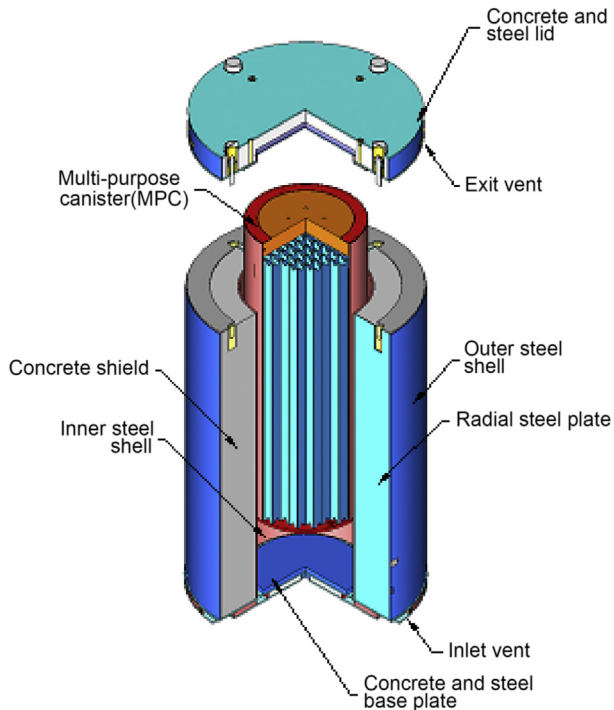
HI-STORM 100 cutaway view Ref. [3].
